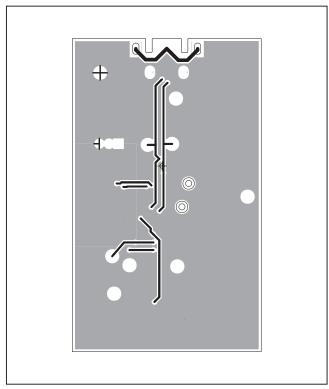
USBOSMB Mother Board PCB Layout—Solder Side
